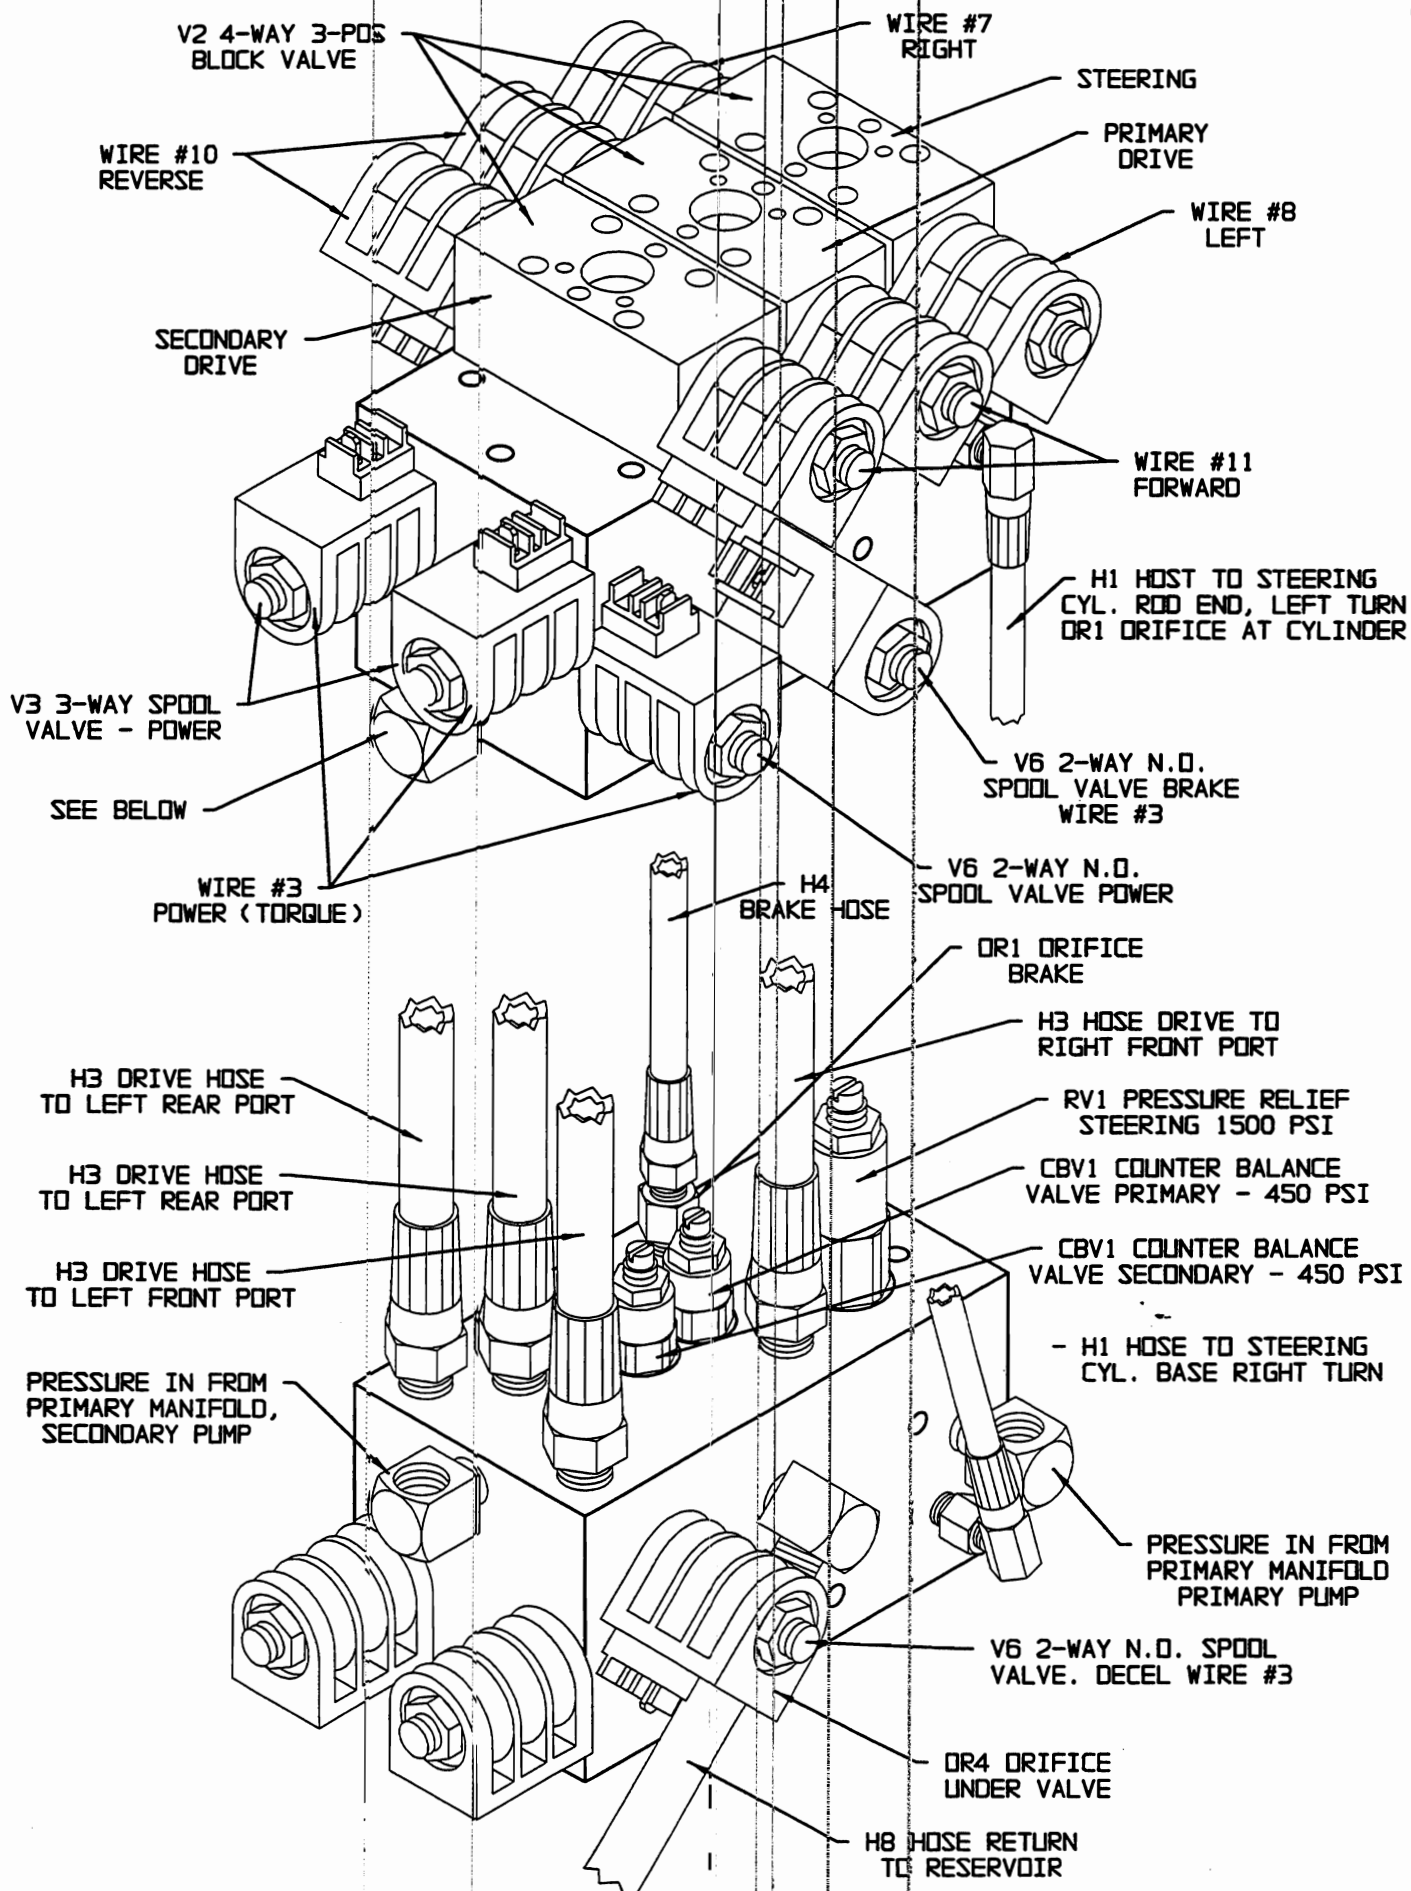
Dual Fuel Secondary Manifold Assembly
